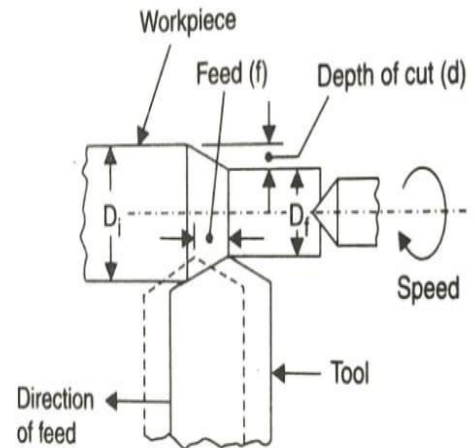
Concept of cutting speed, feed and depth of cut.
